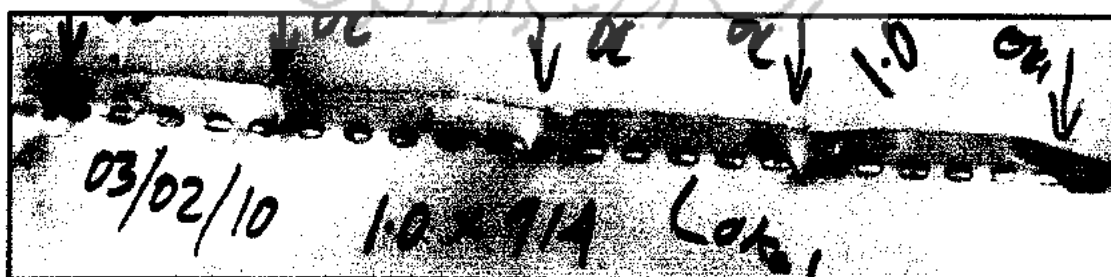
1.0mm x 914mm Strip of Coil Weld
